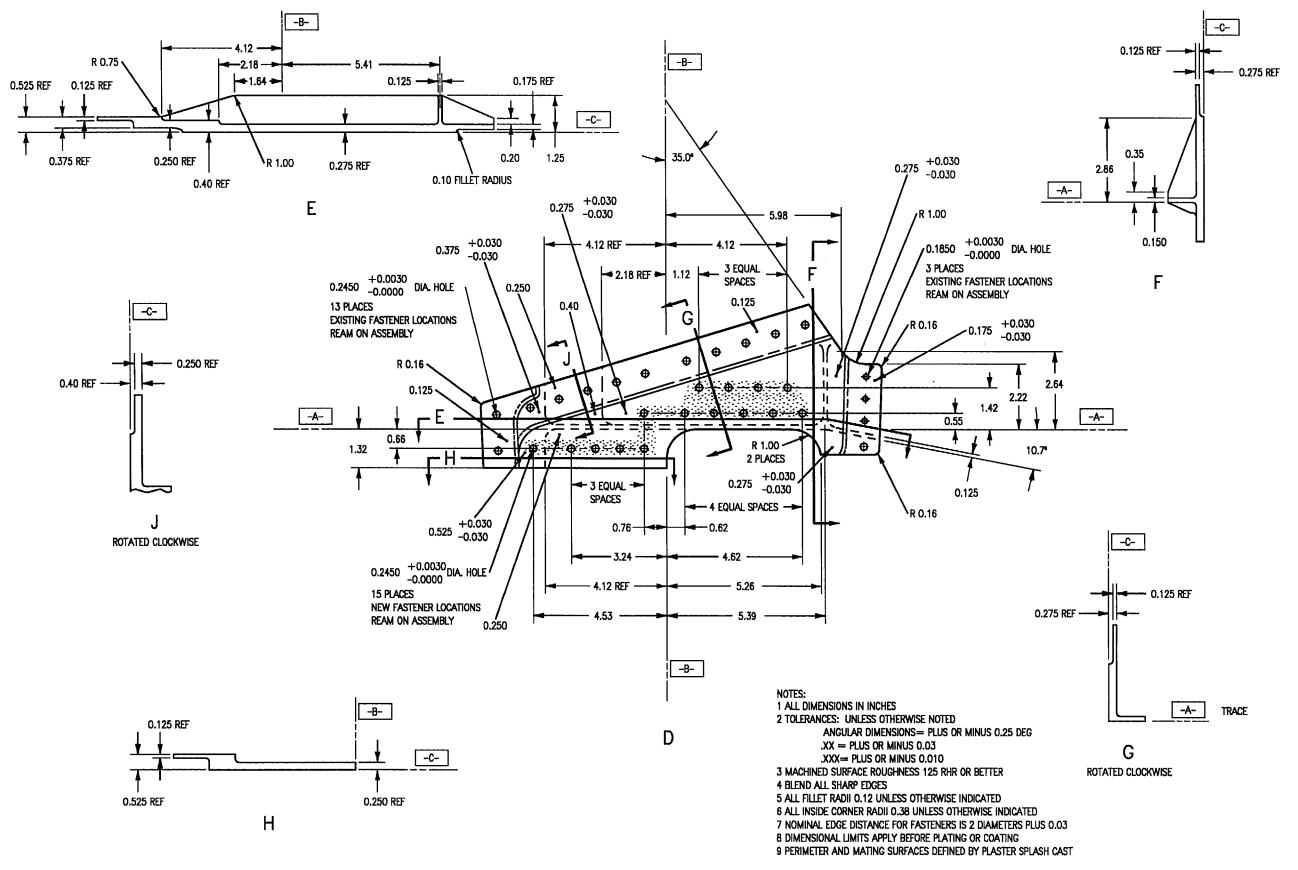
Repair of Damage to 74A110959 Hinge Half Caused By Trailing Edge Flap Actuator (Sheet 4)
